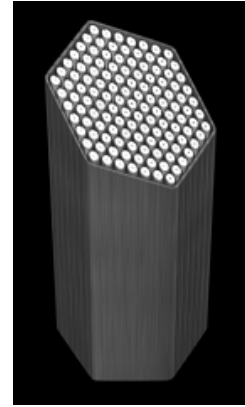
(b) Three-dimensional X-ray CT image obtained on an oblique surface
